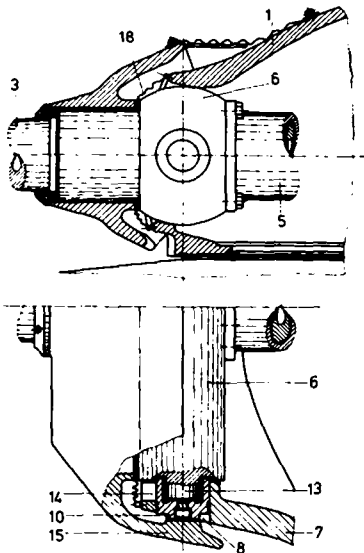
Bearing mounting of the elevation part of a tank cannon in the turret housing of a combat tank.
